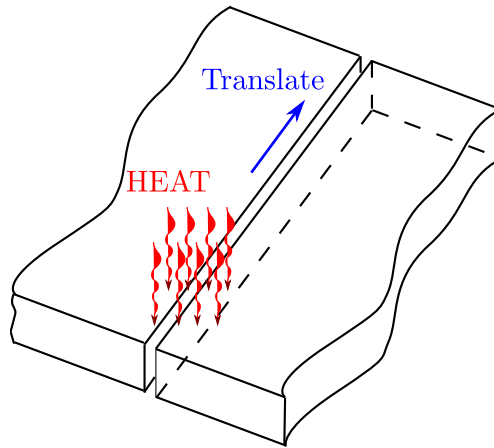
Butt weld schematic. Weld heat is applied and translated along butt joint formed by two plates of same thickness that are just touching. Separation of plates shown for clarity.
